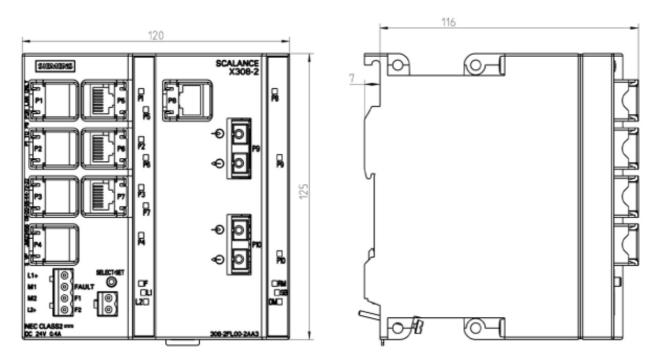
Dimension drawing SCALANCE X-300 (here based on the example of the SCALANCE X308-2)
